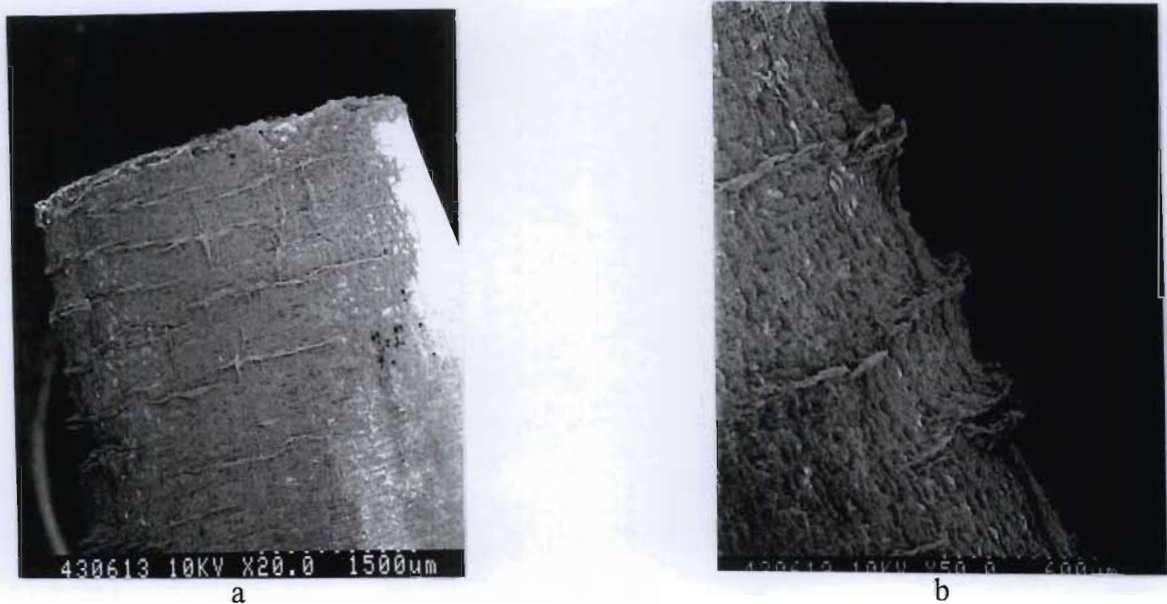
Fractography of uncoated MAR-M002 after HTLCF in SO_2 containing environment showing corrosion on the external surface close to the fracture surface (S.R. 0.38%)
